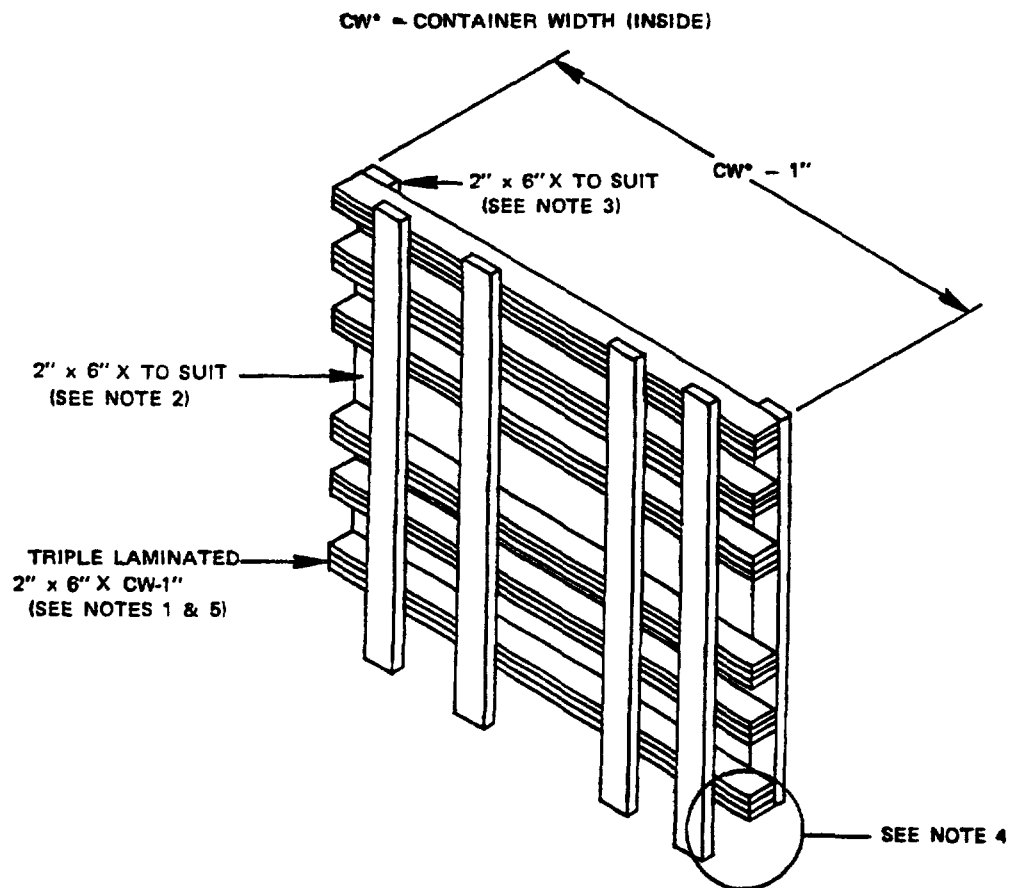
A. Typical front bulkhead with six triple laminated beams.
